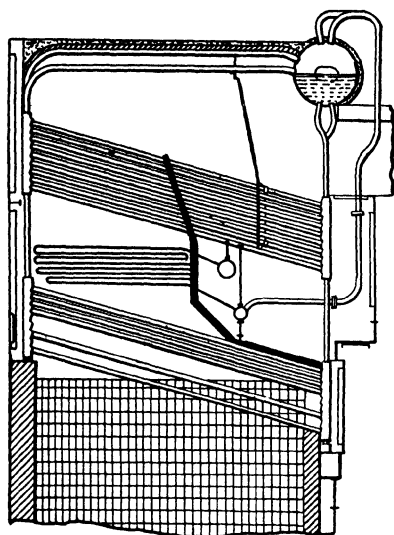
Cross-drum straight-tube sectional-header boiler with slag screen to prevent ash slag from clogging entrance to boiler passes. (*Babcock and Wilcox Company.*)
